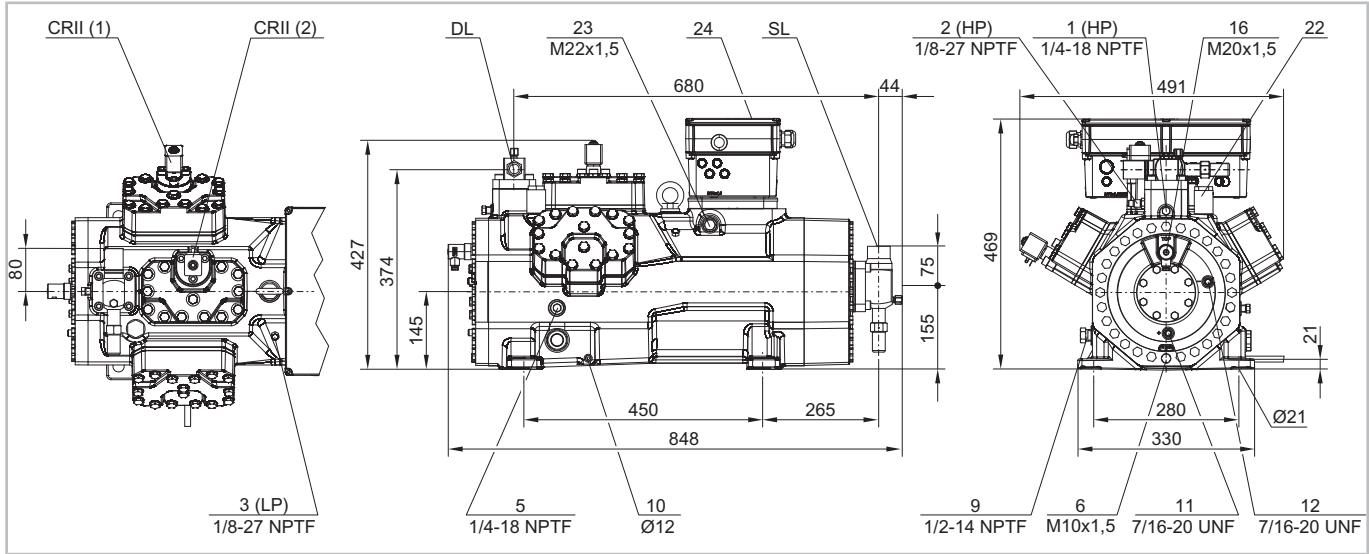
Dimensional drawing 6FTEU-35LK .. 6CTEU-50LK
